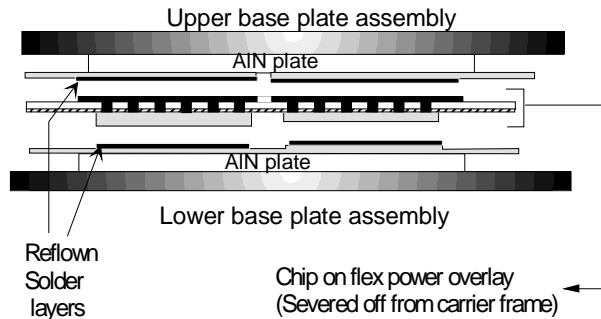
POL is placed between the upper and lower base plate assemblies and reflowed to form the power circuit.
